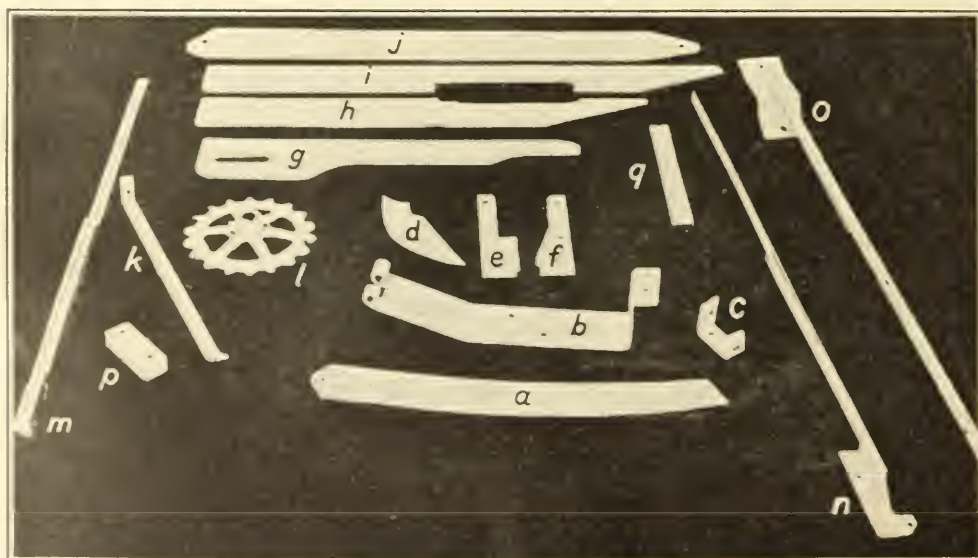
Separate parts of low-cutting attachment for Massey-Harris corn binder: *a*, Stationary knife; *b*, knife bracket; *c*, connecting bracket; *d*, elevating chute; *e*, *f*, left and right side knives recut; *g*, extension board for outer divider lower chain; *h*, *i*, lower and upper special platform boards; *j*, extension board for upper butt conveyor chain; *k*, special brace for platform; *l*, special drive sprocket with 18 teeth; *m*, *n*, *o*, upper rear, lower rear, and front throat springs with brackets; *p*, extension block for upper front throat spring bracket; *q*, extra support board for front throat spring bracket
